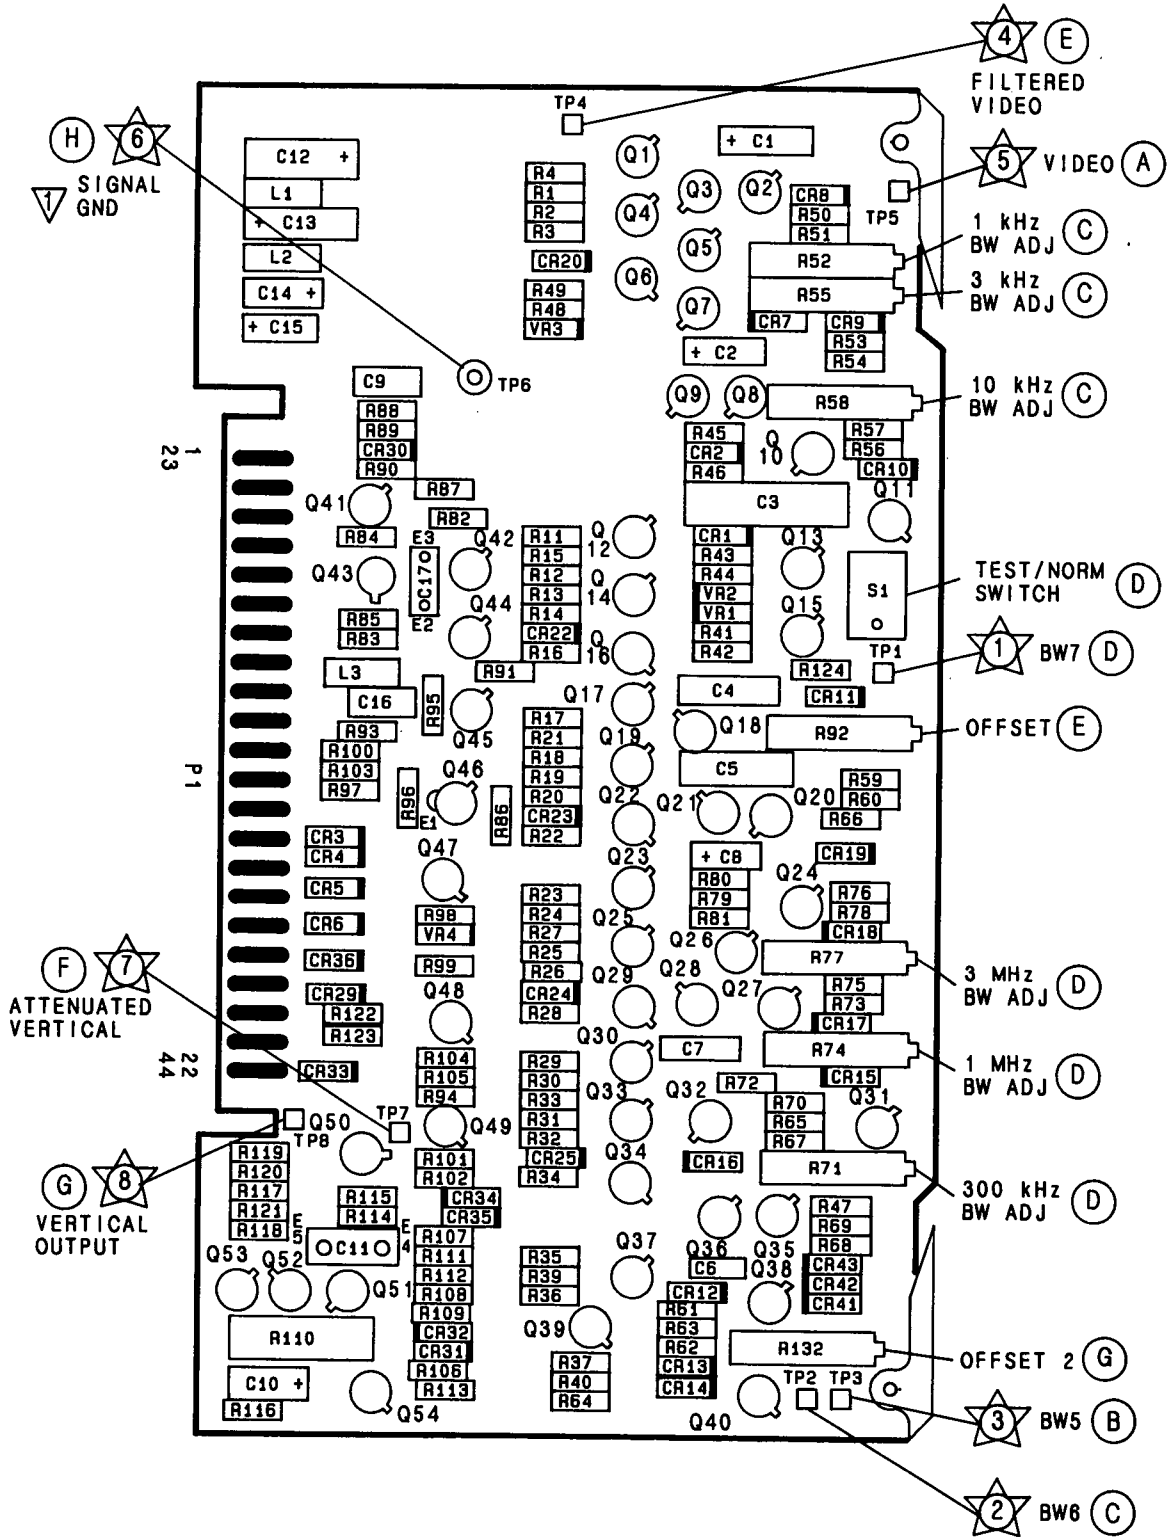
A21 Video-100 Hz Assembly (Option 002), Component Locations
